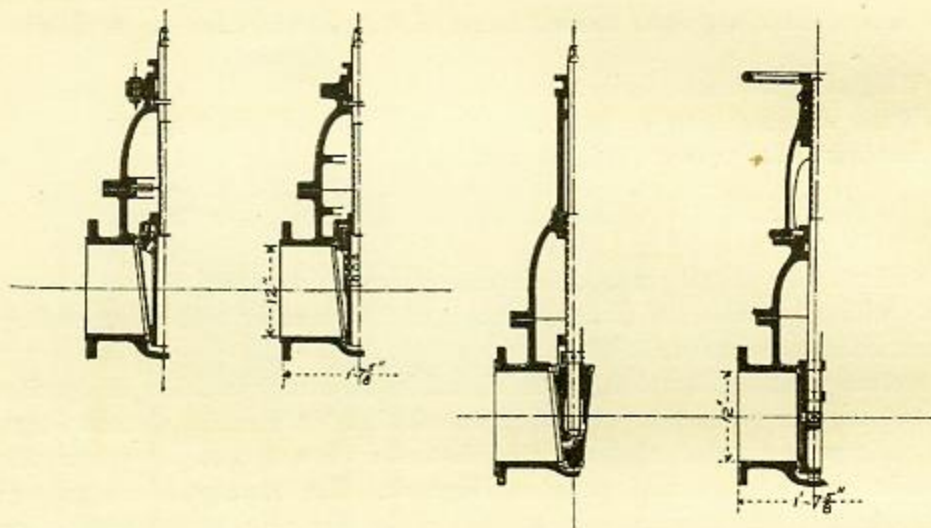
, 28, 29.—Gate Valves with Wedge-shaped Discs. FIG. 30.—Gate Valve with Parallel Faced Disc.
